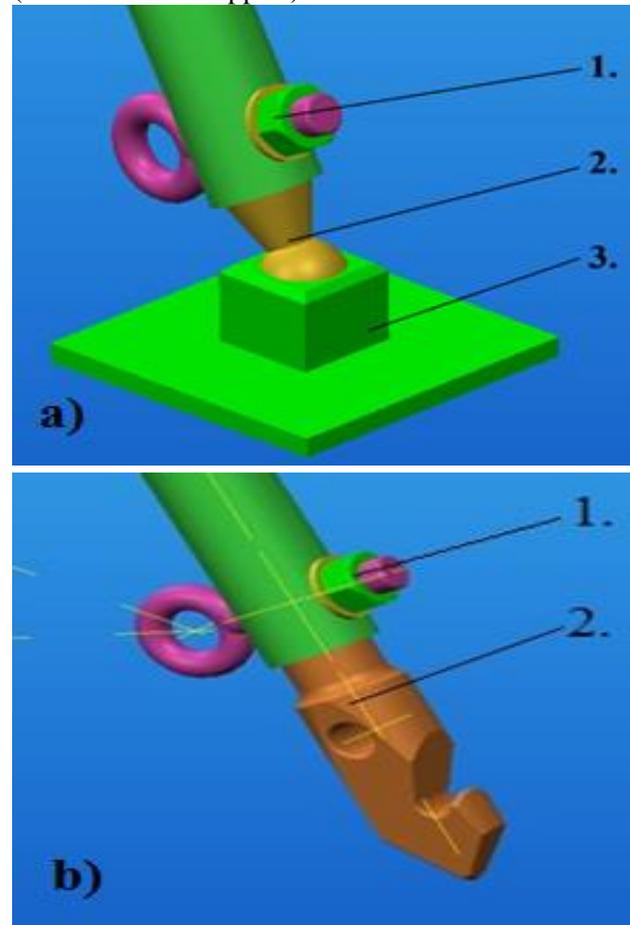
Fixing system, on the ground: a) sole plate (1- bolt, 2-ball joint, 3-sole plate), b) claw fixing (1- bolt, 2- claw);
